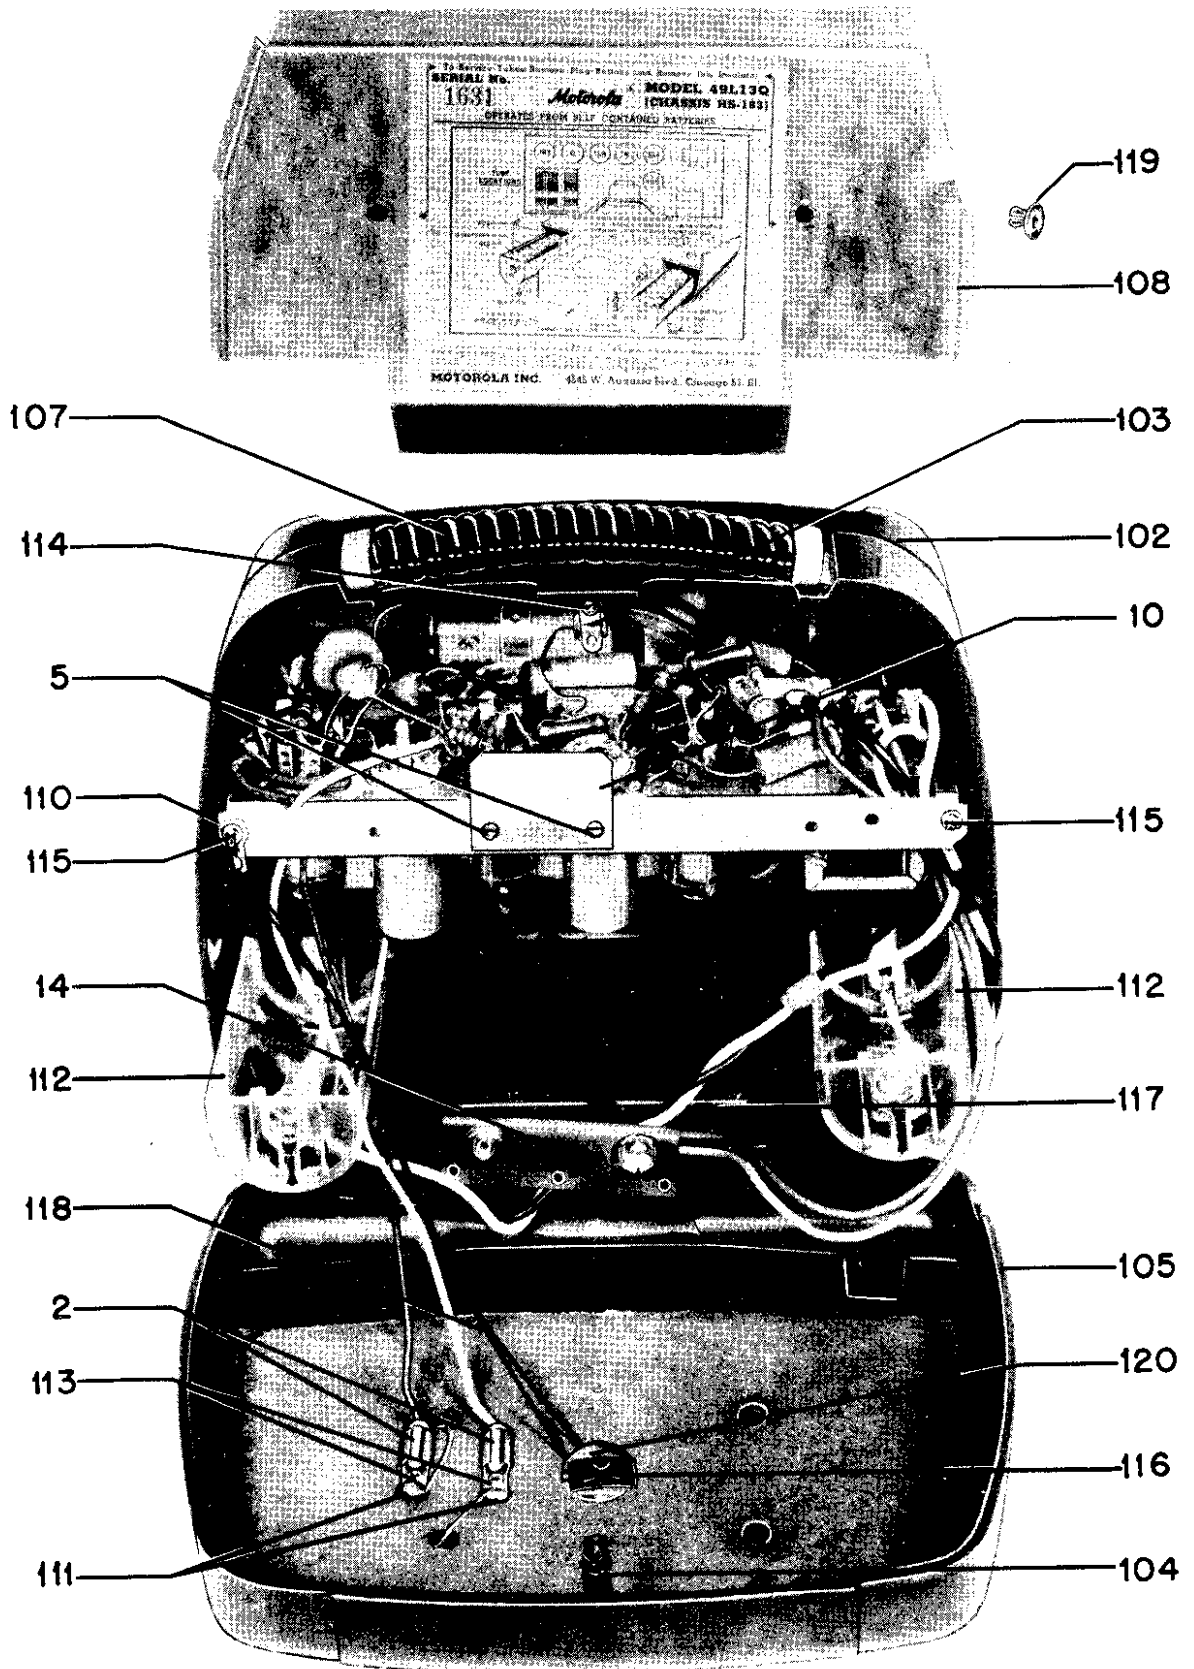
PARTS LOCATION - CABINET REAR VIEW
